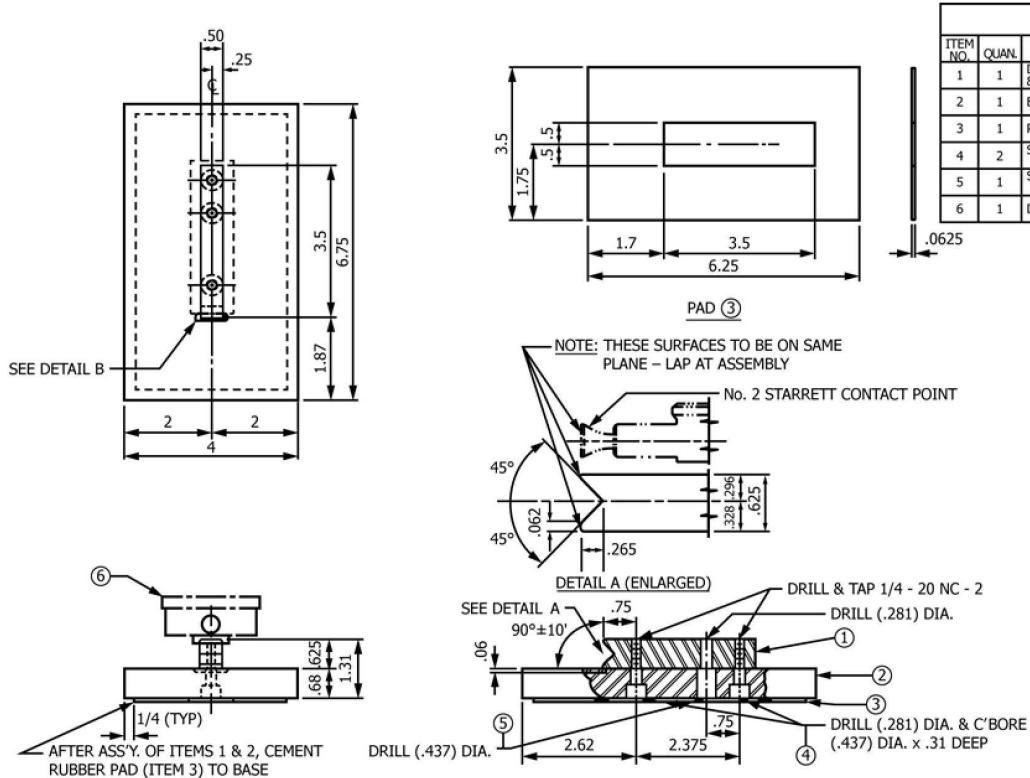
Assembly and Details for Lateral Expansion Gauge
